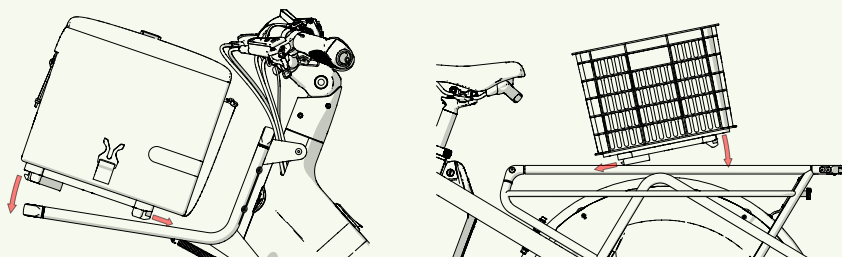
Attach bicycle accessories with integrated MIK adapter plate
